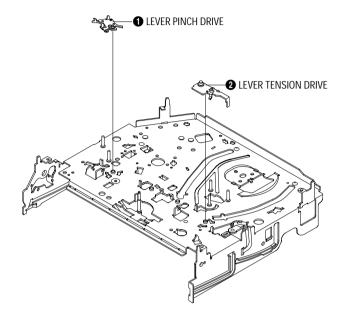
Lever Pinch Drive, Lever Tension Drive Removal
